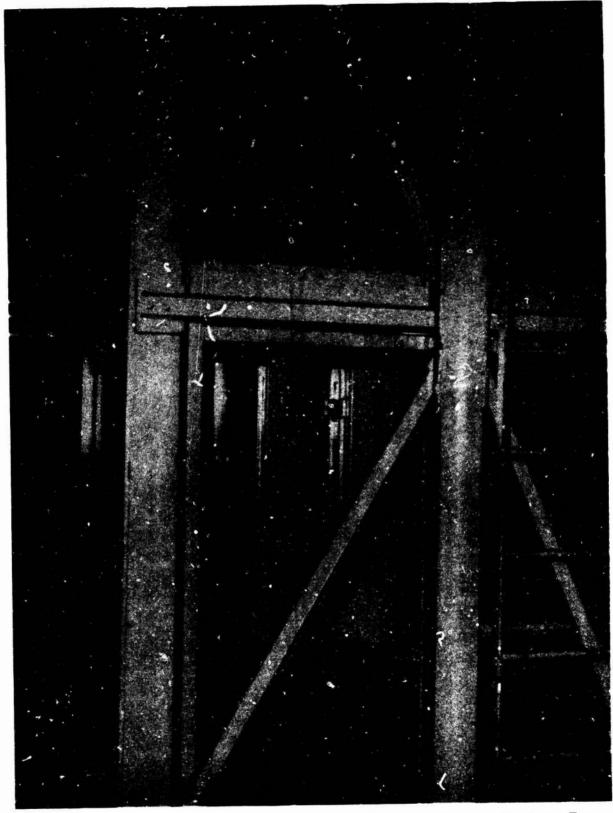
Side View of Assembled Buckling Restraint Fixture on Structural Simulation Test Specimen in Fatigue Test Machine
